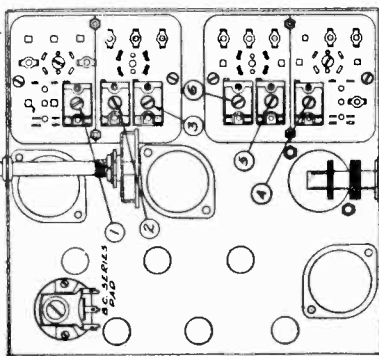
BOTTOM VIEW SHOWING TRIMMERS
